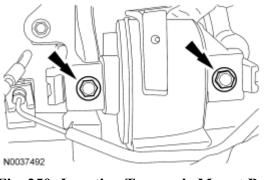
Locating Transaxle Mount Bolts Courtesy of FORD MOTOR CO.
